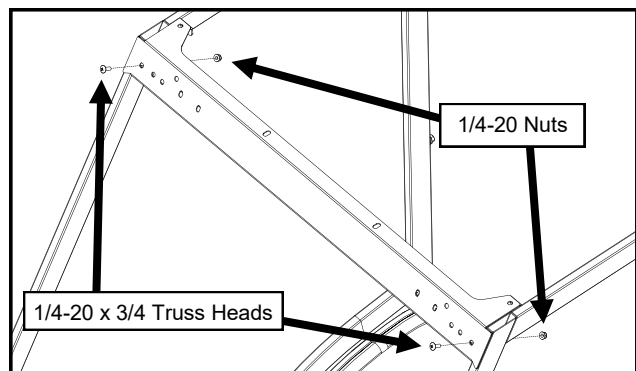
(Windshield Support to Side Frame Fasteners)
